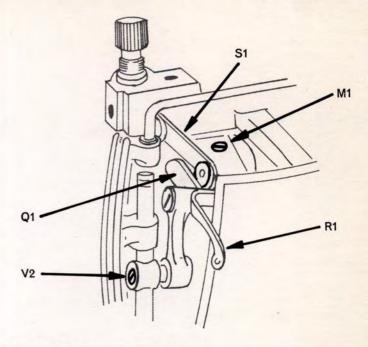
Thread Take-up Mechanism to Eliminate End Play or Binding in Thread Take-up Mechanism.
